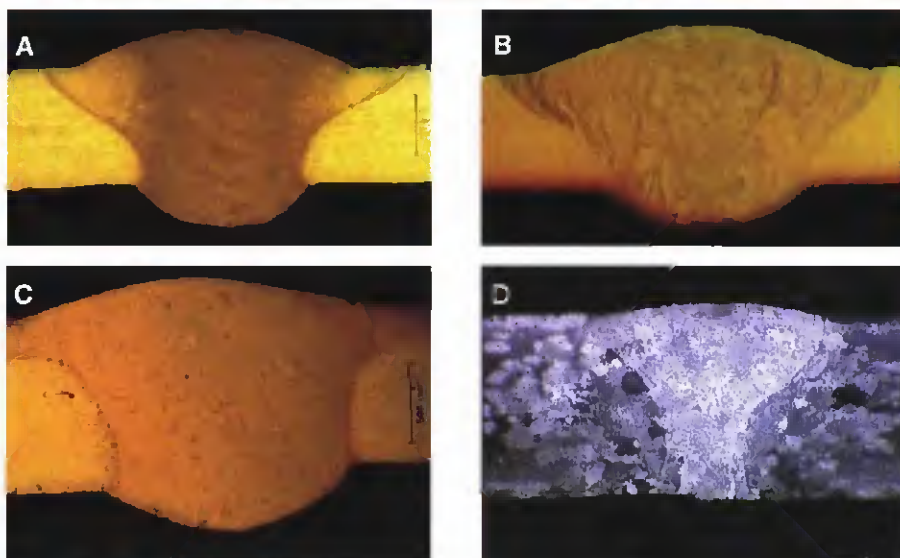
Nonvacuum electron beam welds in butt joints on different alloys, prepared with sheared edges, using suitable filler wires. A — Al-5%Mg-Mn (1 mm) + wire Al-4.5Mg-Mn, 30 m/min welding speed; B — Al-0.4%Mg-1.2%Si (1 mm) + wire Al-4.5Mg-Mn, 30 m/min welding speed; C — Al-0.4%Mg-1.2%Si (1 mm) + wire Al-12%Si, 60 m/min welding speed; D — Al-Mg-0.7%Si (4 mm) + wire Al-5%Si, 10 m/min welding speed.
